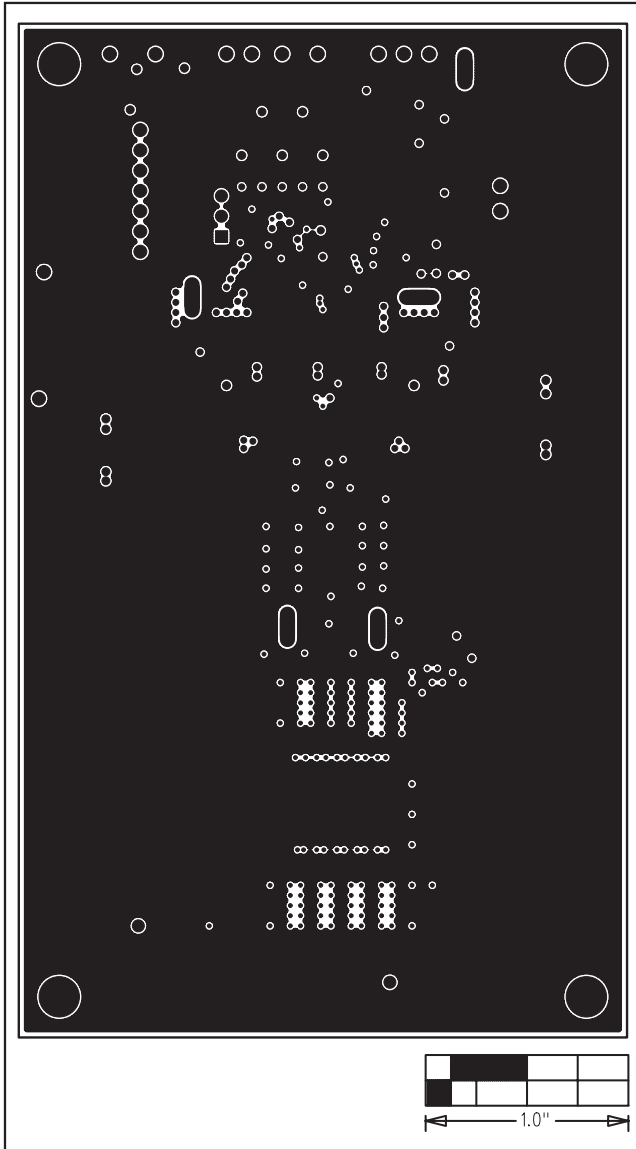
MAX17021 EV Kit PCB Layout—Internal Layer 4 (PGND Layer)
